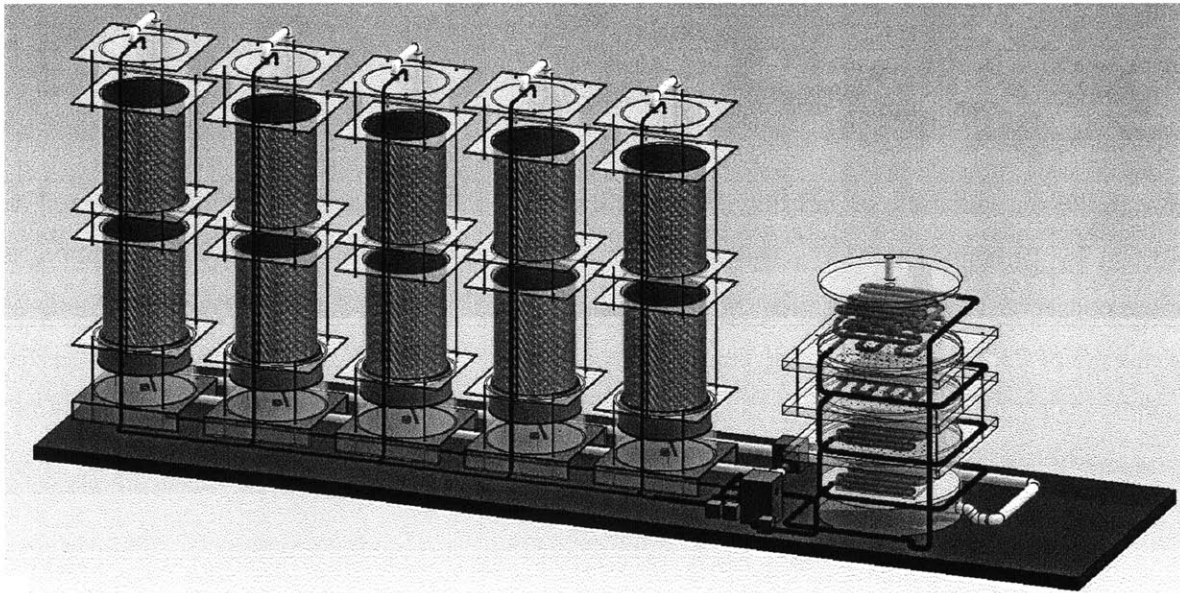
5: Full SDS Solid Model Assembly – Isometric View
